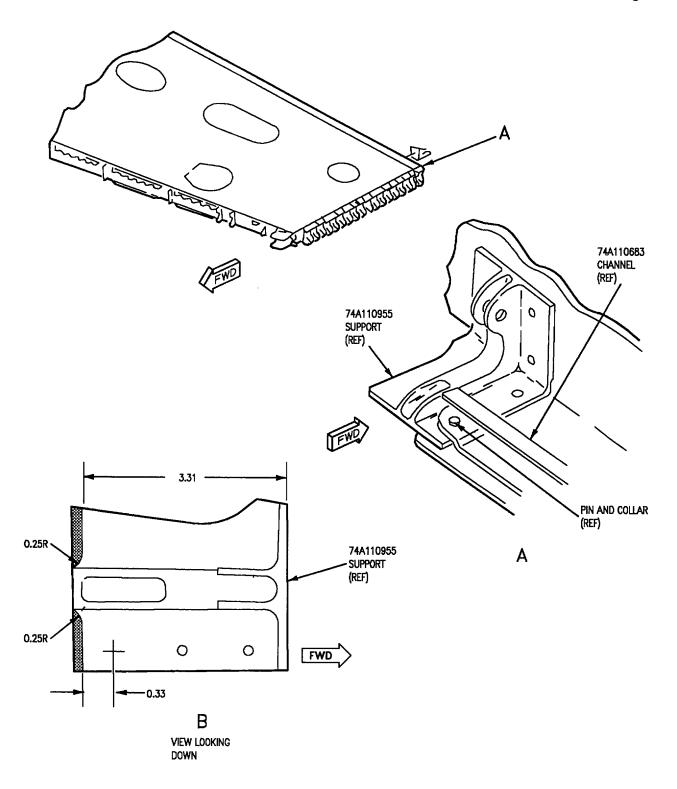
Inboard Pylon Lower Bushing Alignment (Sheet 2)
